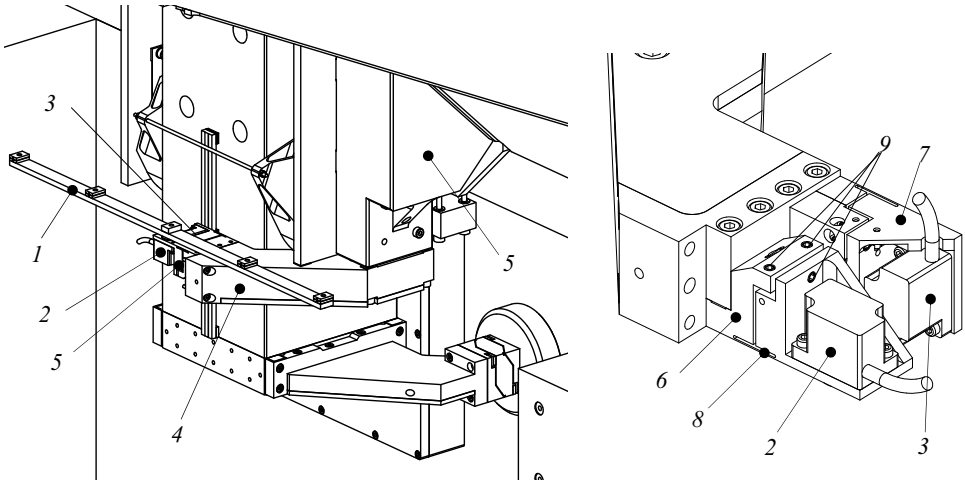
R-stage linear scale and read head alignment mechanisms (upside down)
